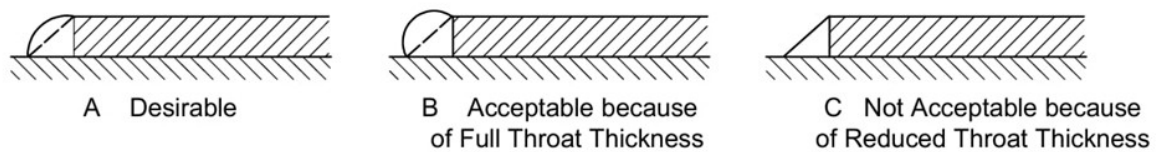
Full size fillet weld applied to the edge of a plate or section.
